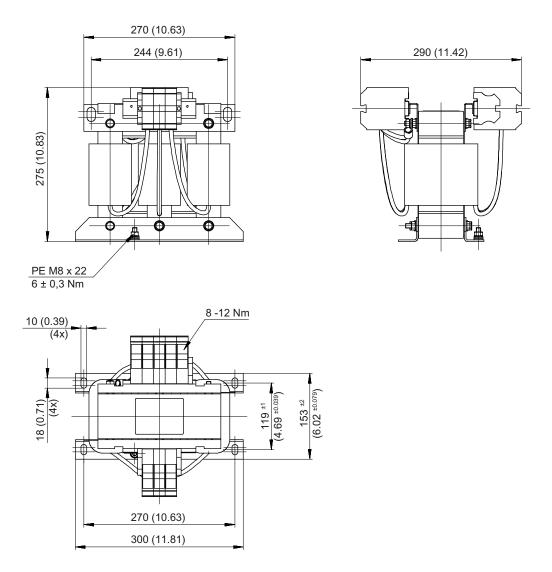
Dimension drawing of line reactor for Smart Line Module 55 kW, all dimensions in mm and (inches)
